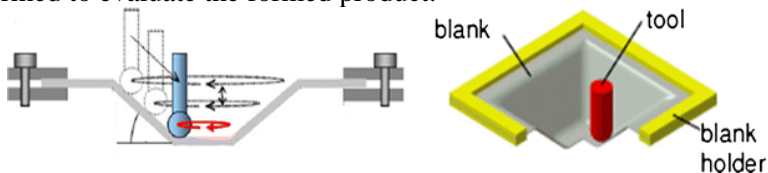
Sheet pressed at the edges formed by a single tool [20]
